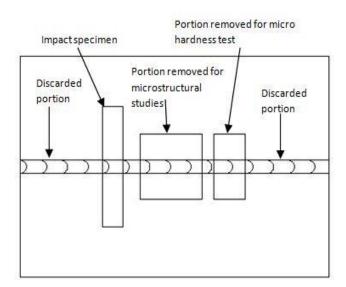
Schematic illustration of specimen sampling from welded plates
